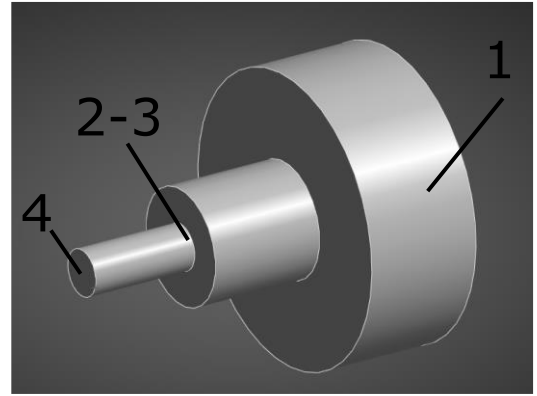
The points on the model of the coupled tool-tool holder and spindle-encoder unit.
